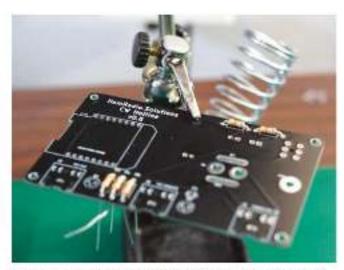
Using a vice may be beneficial while assembling this kit. Here is an alligator clip holding up the PCB. The alligator clip has rigid edges that, if placed on a trace, may cause damage.
